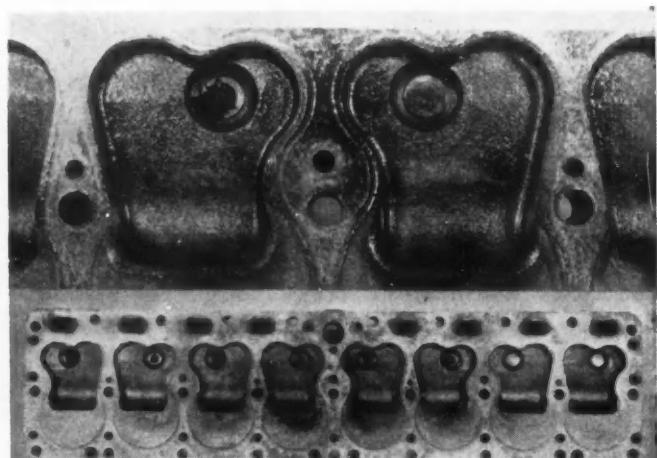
Carbon Deposited in Spark Plugs During a Motoring Test
